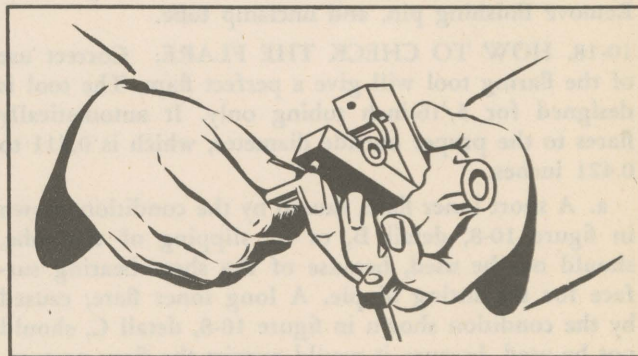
Placing Burred Tube in Double Flaring Tool
